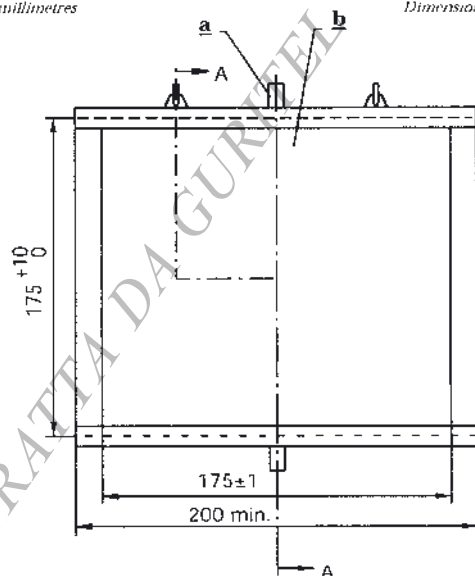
Mounting support for sample for mechanical impact test (9.12.1)
